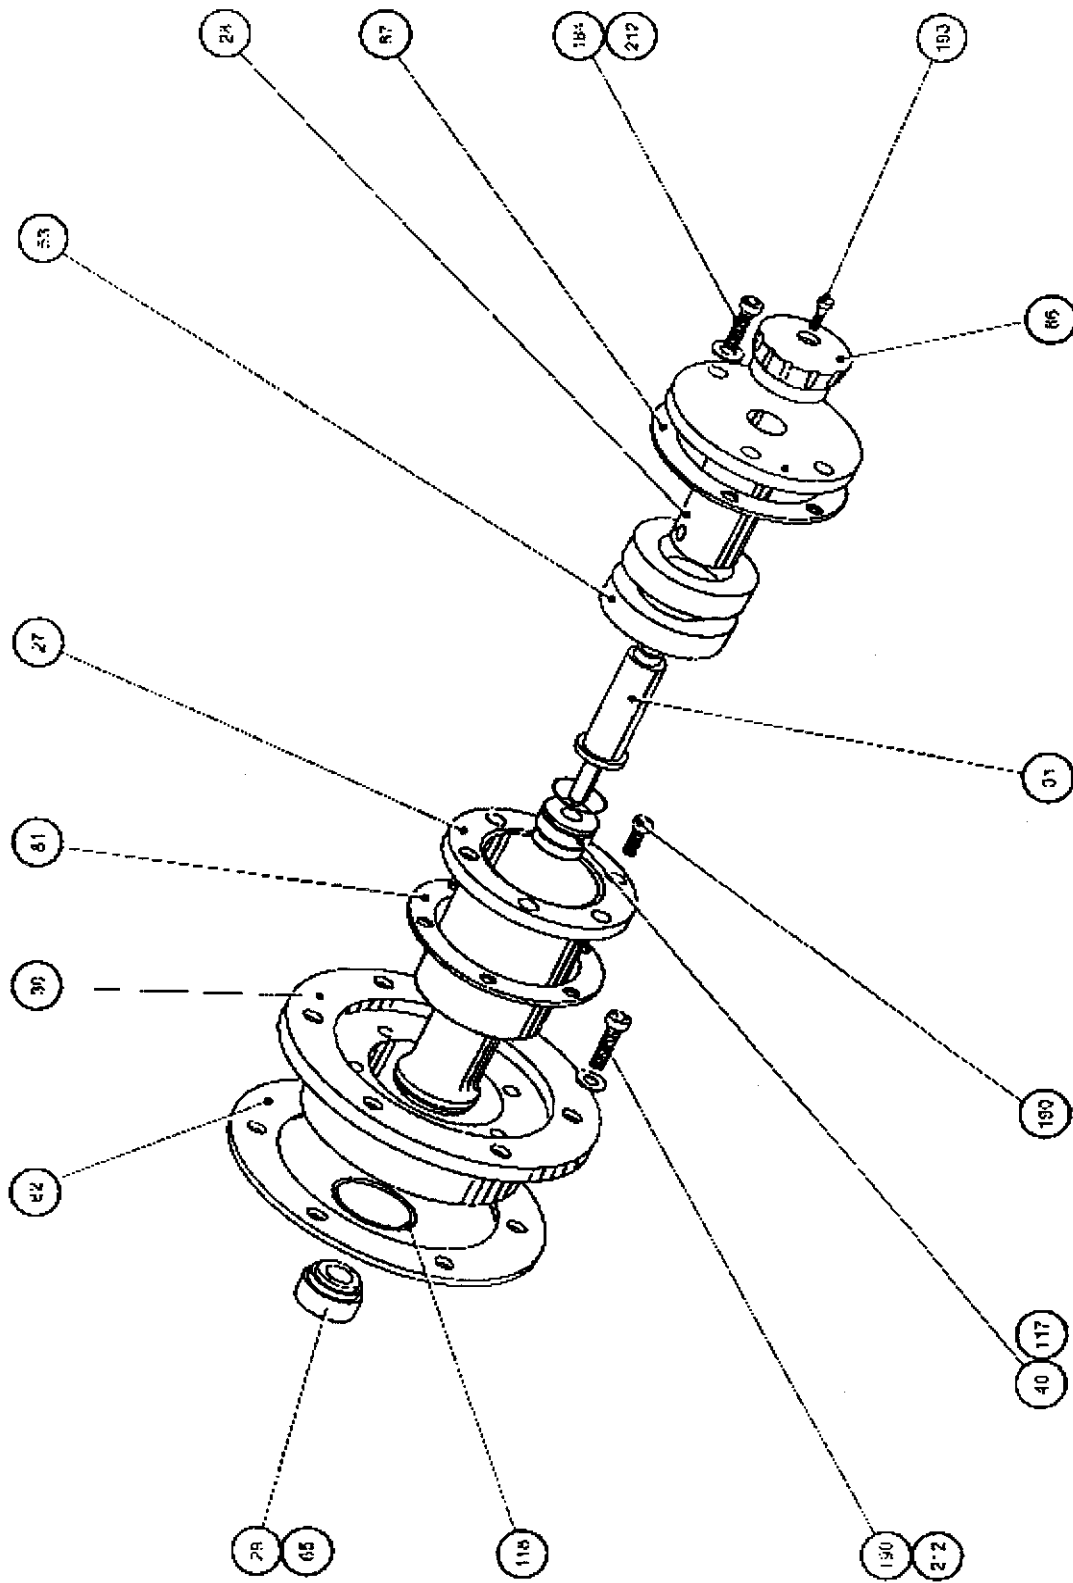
(D) E2M175S/E2M275S Gas ballast valve sub-assembly
